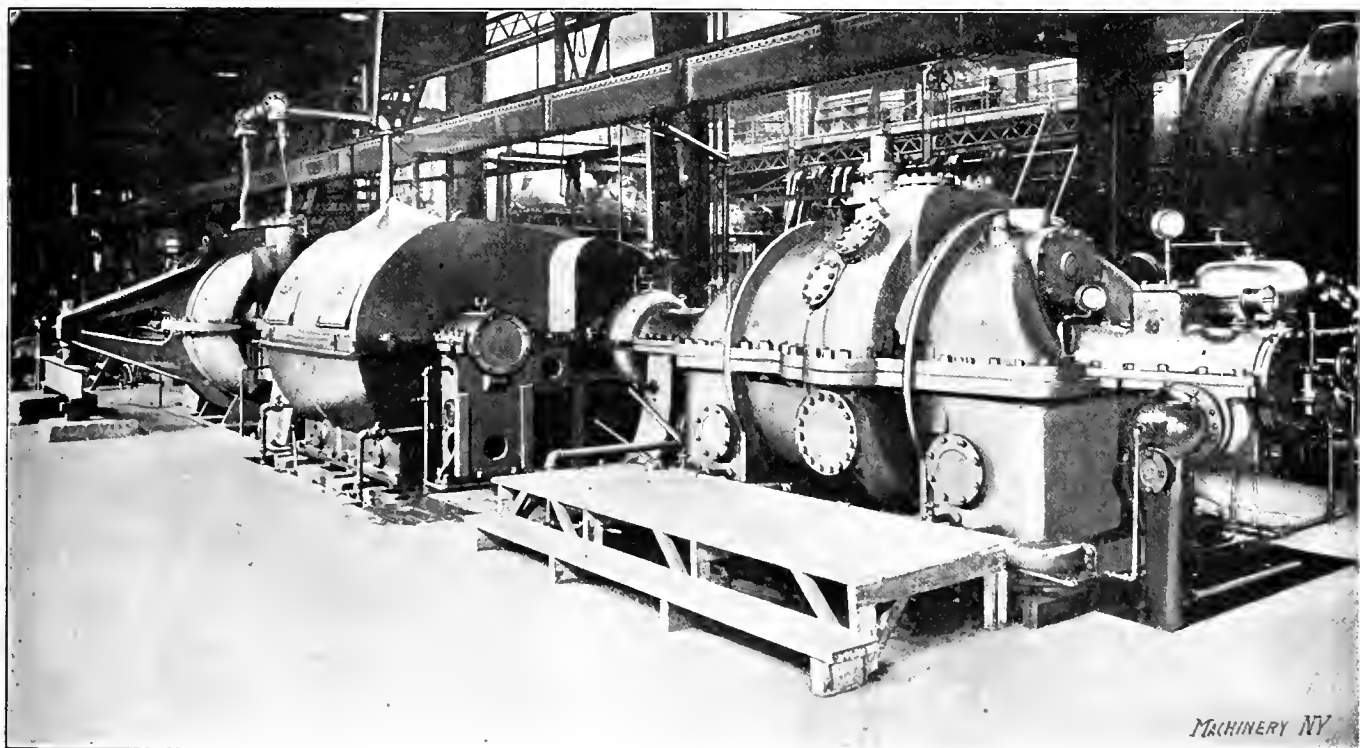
6,000-horsepower Steam Turbine, Melville-Macalpine Reducing Gearing, and Hydraulic Dynamometer, set up on Floor of Testing Department
